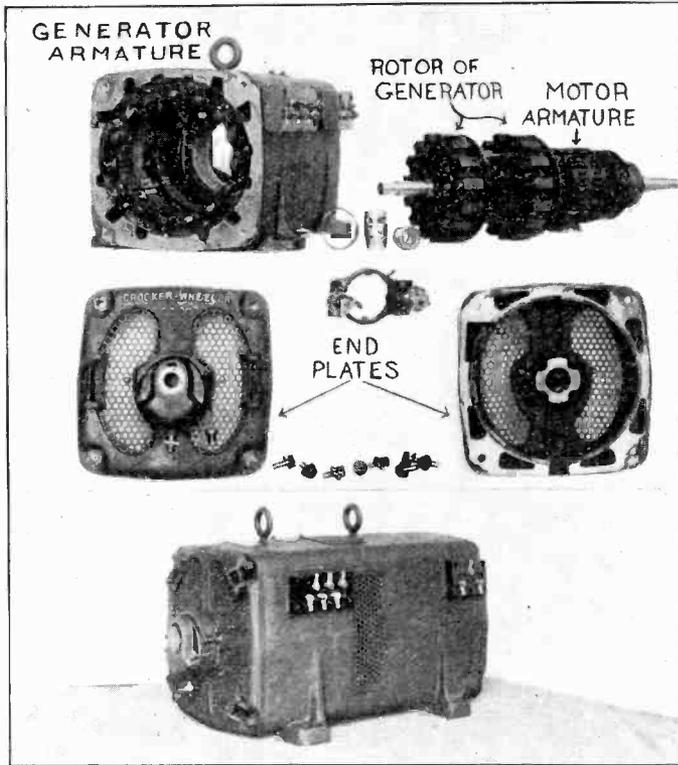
Exploded and Assembled views of a Two-Kilowatt Five Hundred cycle Motor Generator of the Inductor Type
